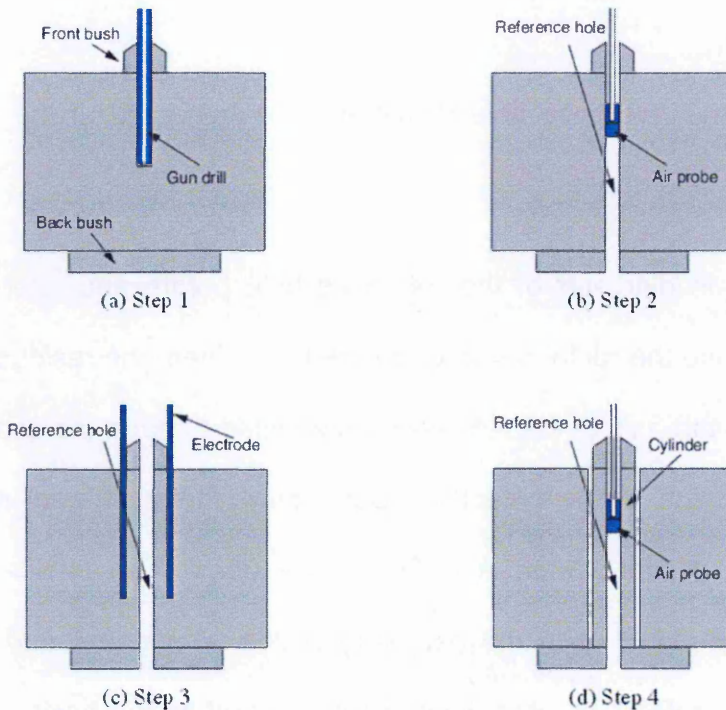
Schematic representation of the deep hole drilling technique (59)
